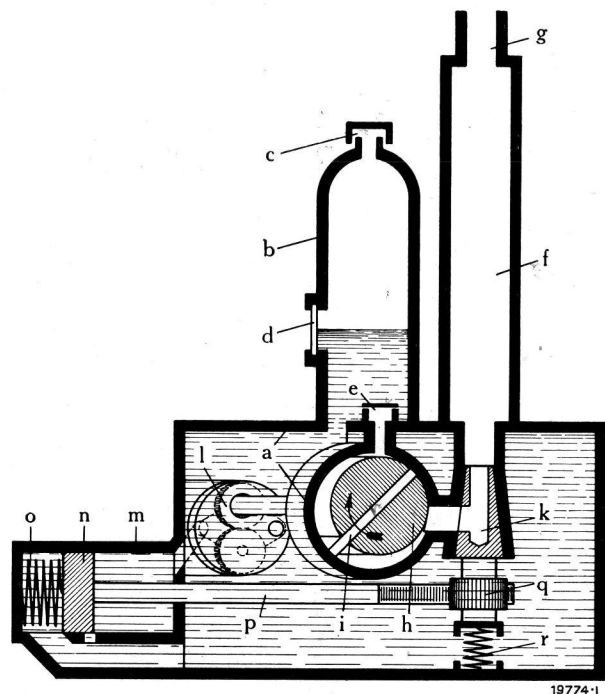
Diagrammatic view of preliminary vacuum pump with combined oil-pressure governor gear type GRP.
